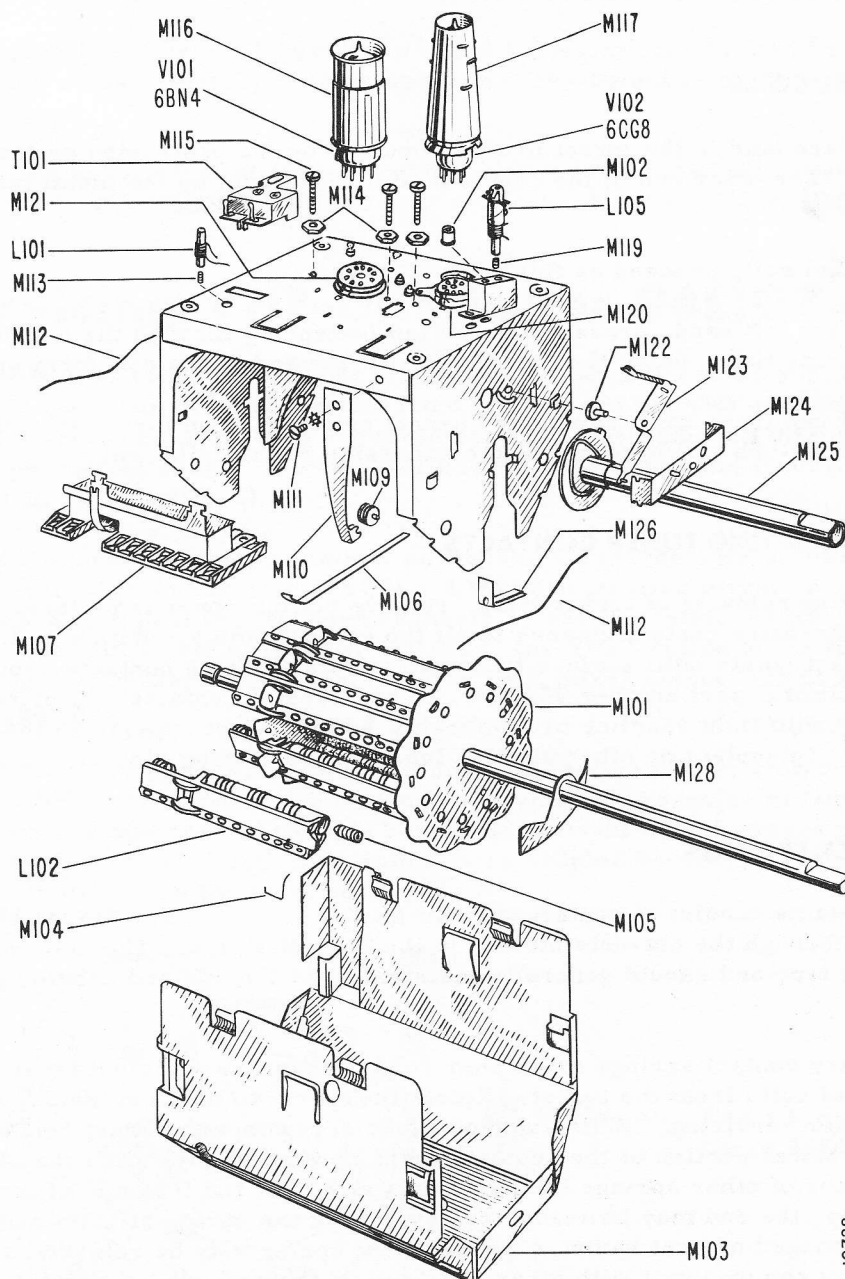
Exploded View of VHF Tuners 94D131-1 and 94D131-2.
